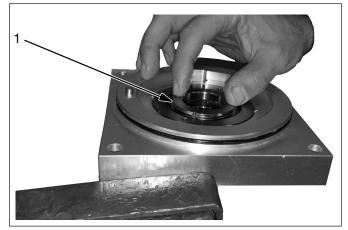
, Stop Ring, Guide Ring and O-ring (View 1 of 2)
